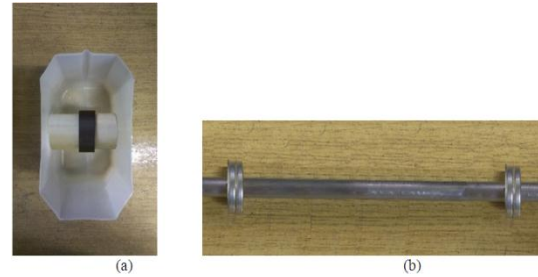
THE FABRICATED PROTOTYPE (a) STATOR INSIDE THE COOLING CHAMBERS, (b) ROTOR: SHAFT AND PM RINGS.
